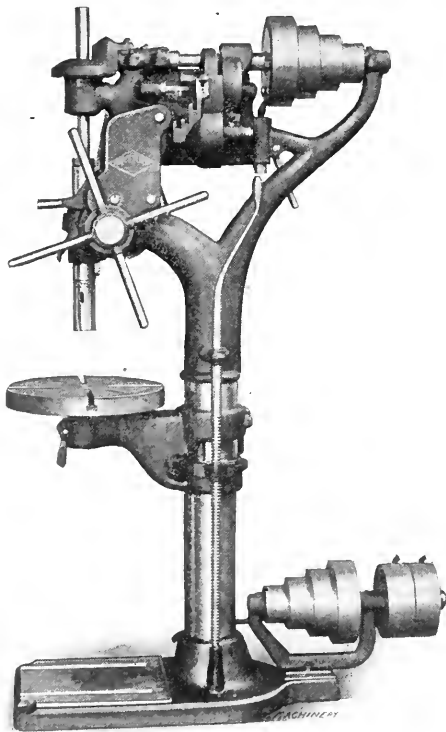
Right-hand Side of Rockford Drill showing Star Feed Handle
